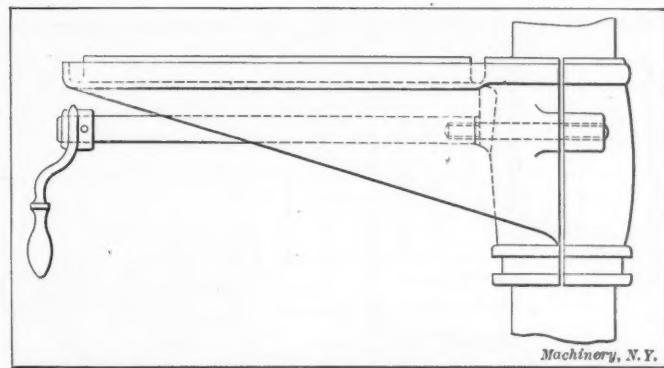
Clamping Handle carried out to Edge of Table for Convenience of Operation
